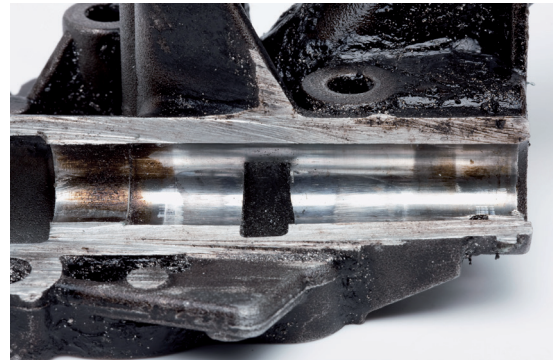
Close-up view of the clogged control valve with clear seizing marks
